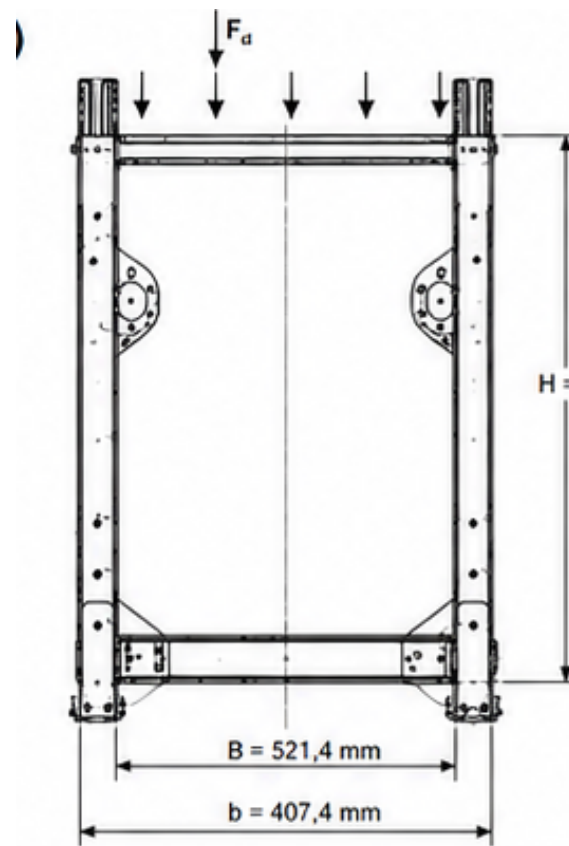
Loading scheme of the welded frame (F_d applied at the top cross-member).
